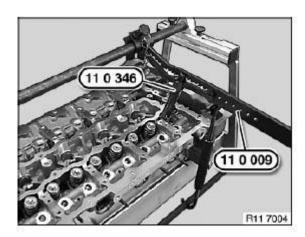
Identifying Special Tools (11 0 009 & 11 0 346) On Spring Retainer Courtesy of BMW OF NORTH AMERICA, INC.
